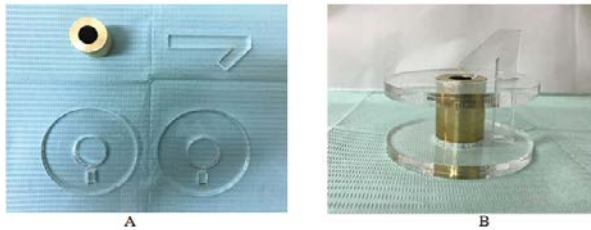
Custom-made mold for wax pattern, (A) unassembled, (B) assembled
